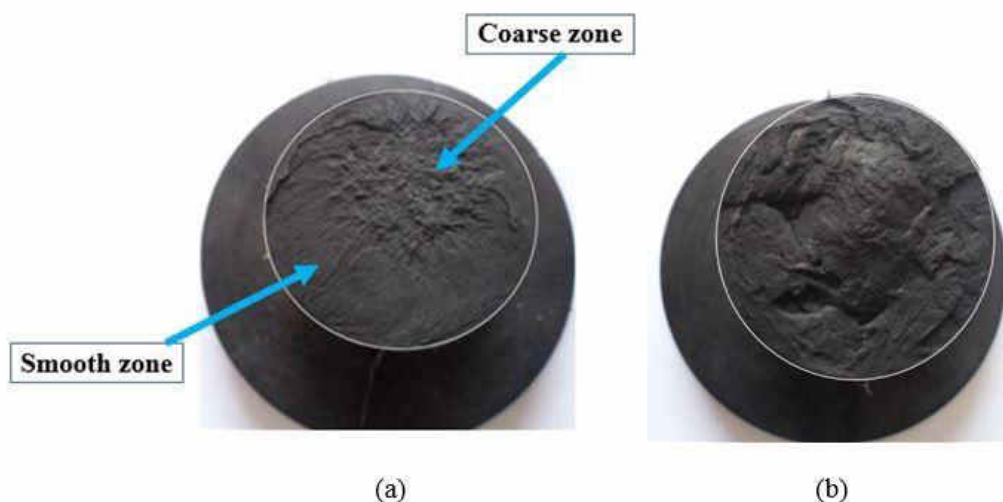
Specimen surface fracture appearance of NBR: (a) 20 Phr, (b) 70 Phr of CB.
